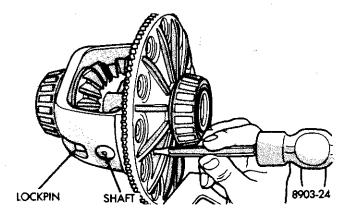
Pinion Gear Mate Shaft Lock Pin Removal (Model 60 & 60M Axles)
